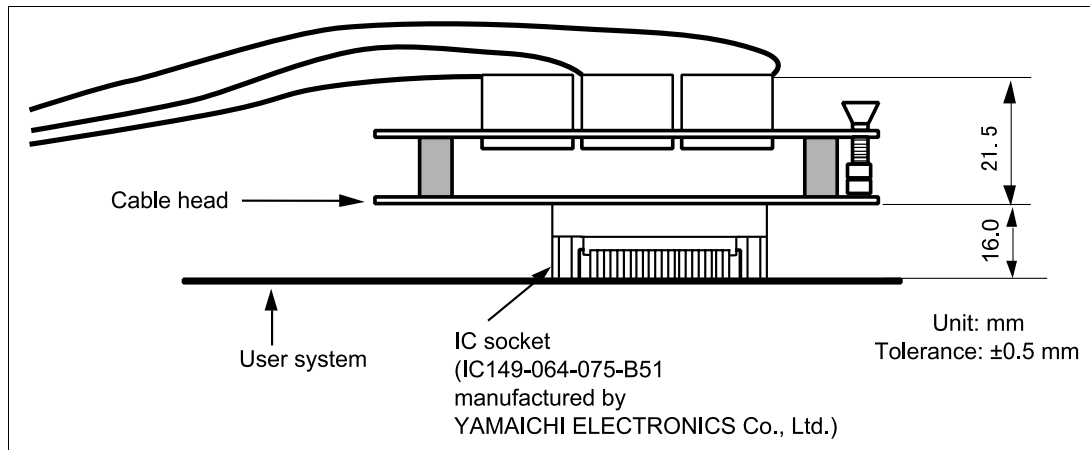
Resulting Dimensions after Connecting User System Interface Cable
